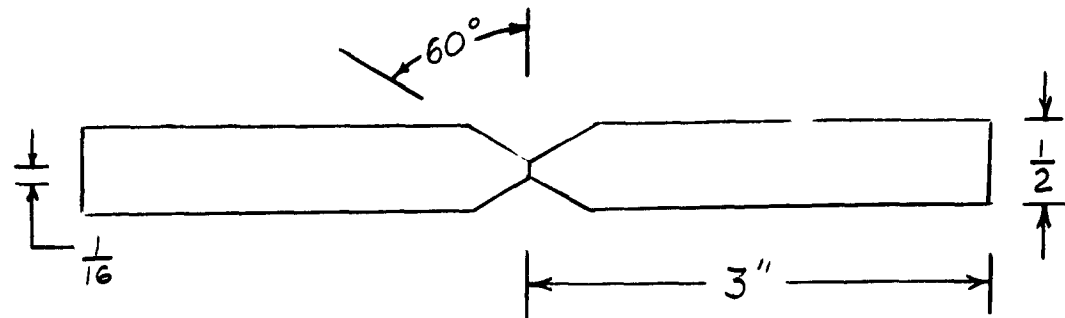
Joint Design Used for Butt Welding Specimens.
